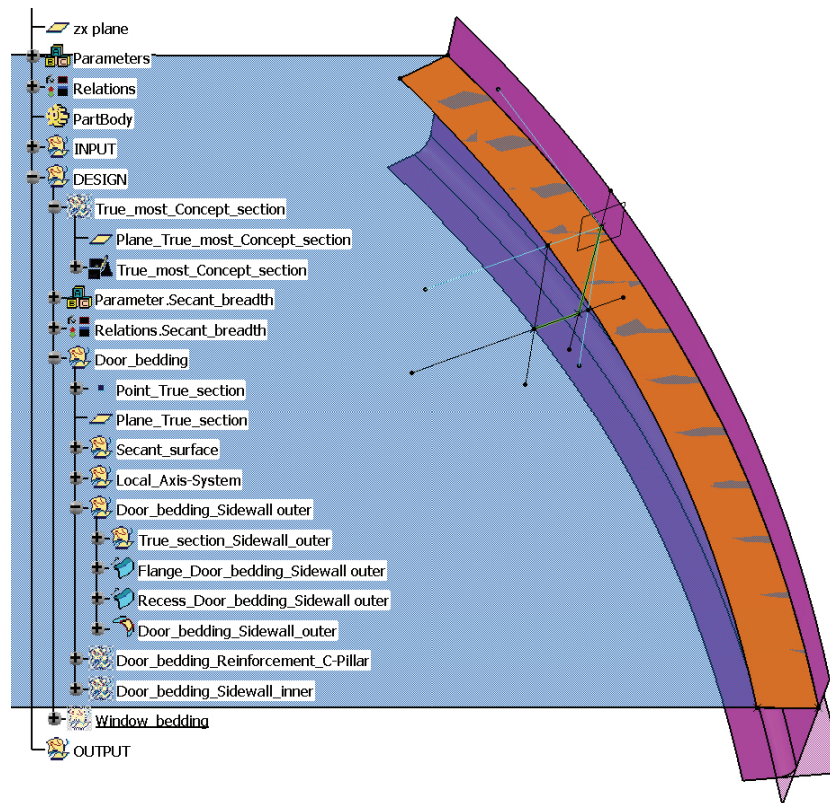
Complete design of true section and prolongation of segments by extrapolation in 3D modelling space (example: door bedding, sidewall outer)
